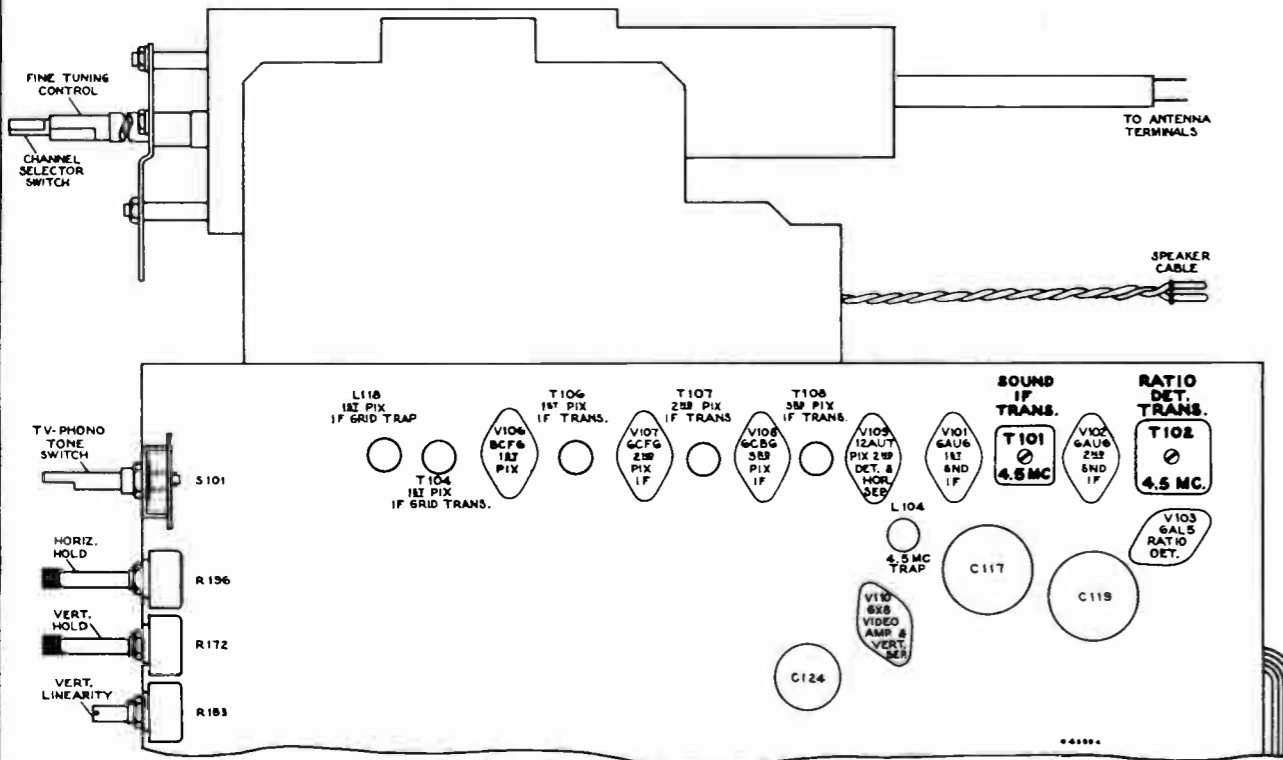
Bottom Chassis Adjustments (KRK29 Tuner shown)
